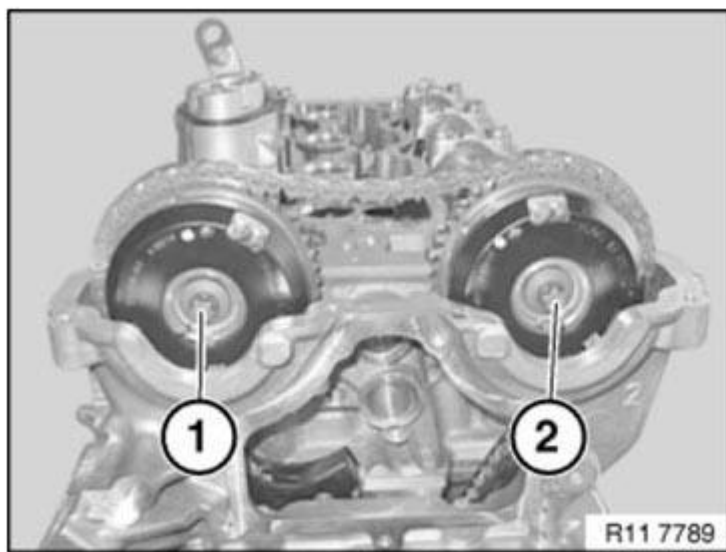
Identifying Central Bolts Of Intake And Exhaust Camshaft Adjusters
